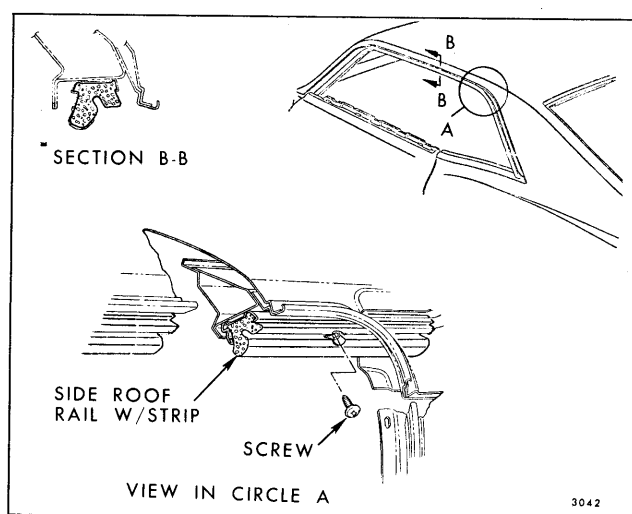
Side Roof Rail Weatherstrip - "E-47" Styles
